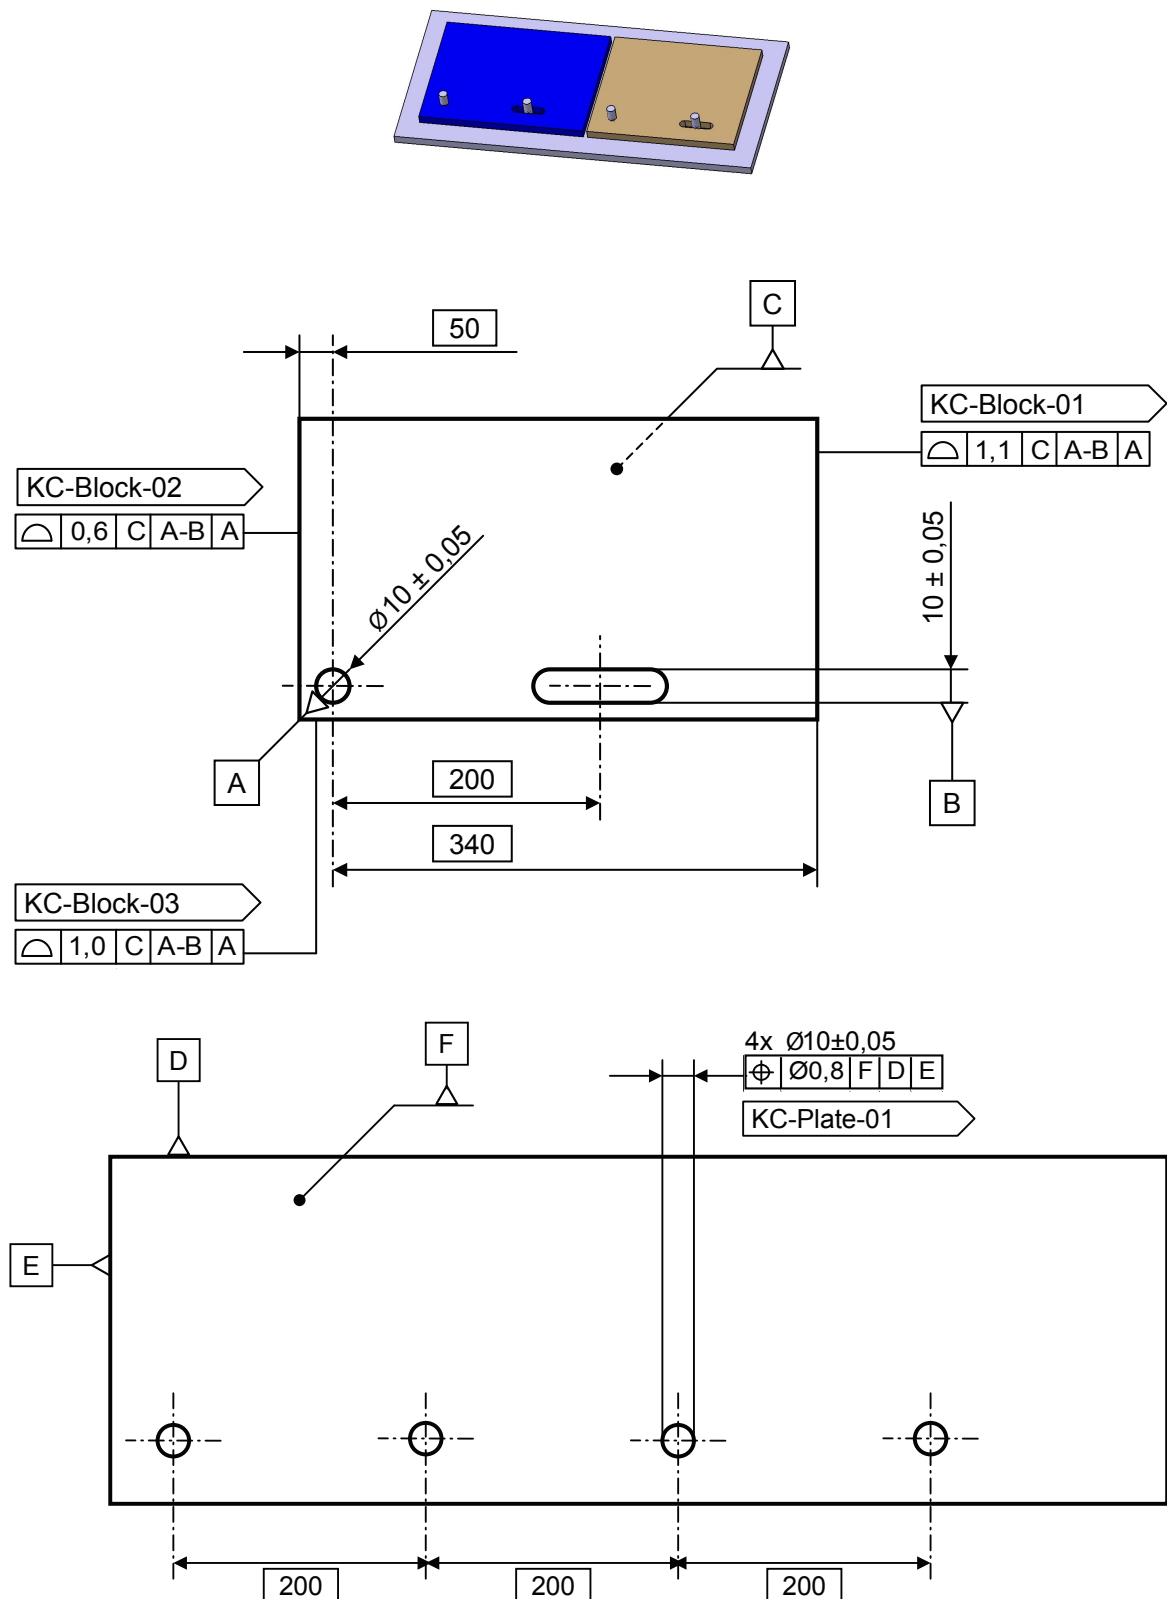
Tolerance specification drawing for an assembly consisting of two blocks (upper drawing) and a plate (lower drawing) using size and GPS tolerances (see appendix A for explanations). Most dimensioning specifications are omitted for simplification.
